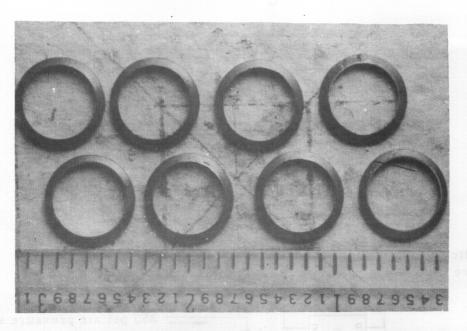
THE DASH FIVE METAL RINGS USED IN THIS PROGRAM
